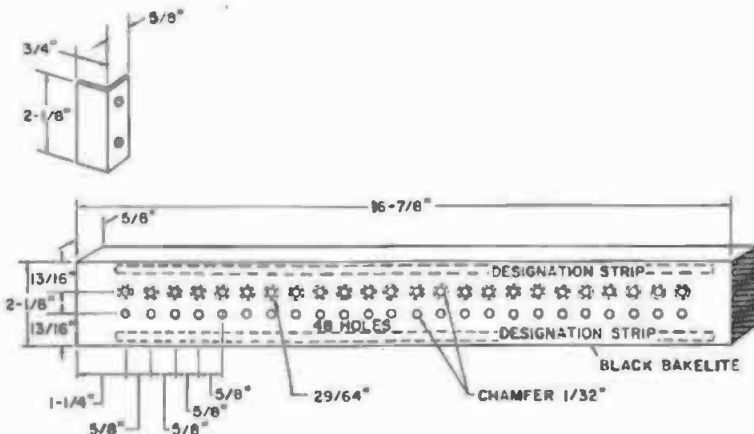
B. Drilling dimensions for a double jack row mounting strip and for the mounting bracket.
